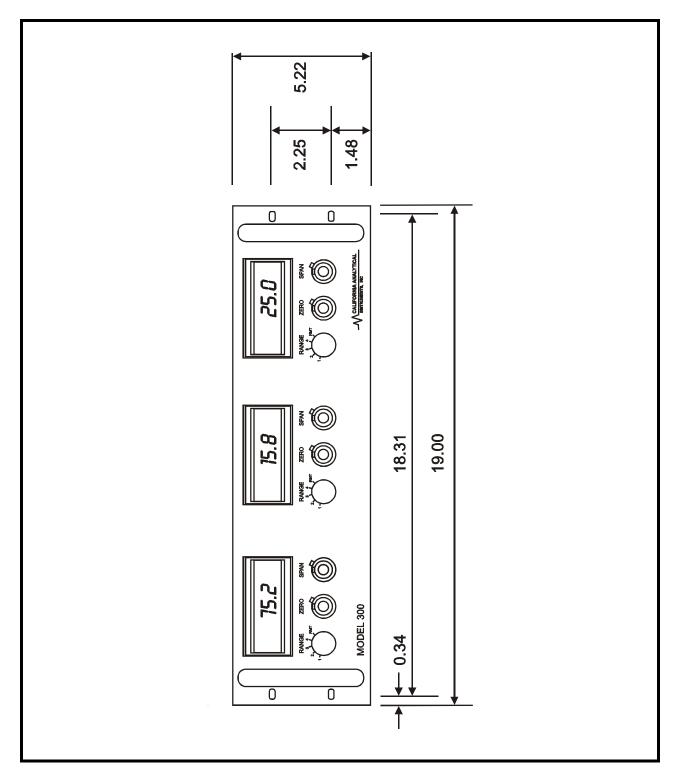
B-1 Analyzer Front Panel Outline & Mounting Dimensions
